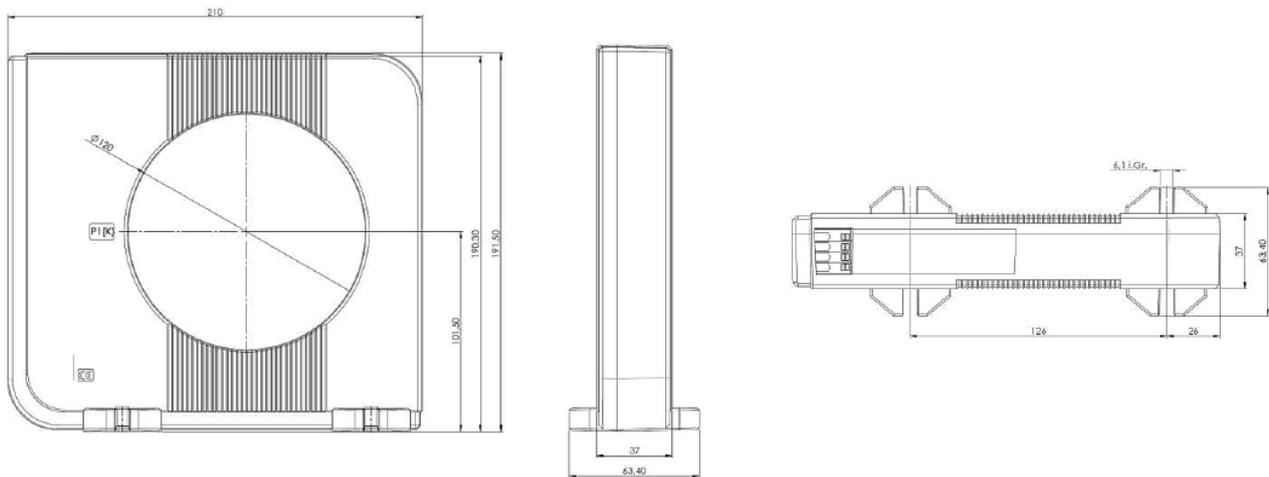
SCT4416-0025 dimensions, all dimensions in mm
